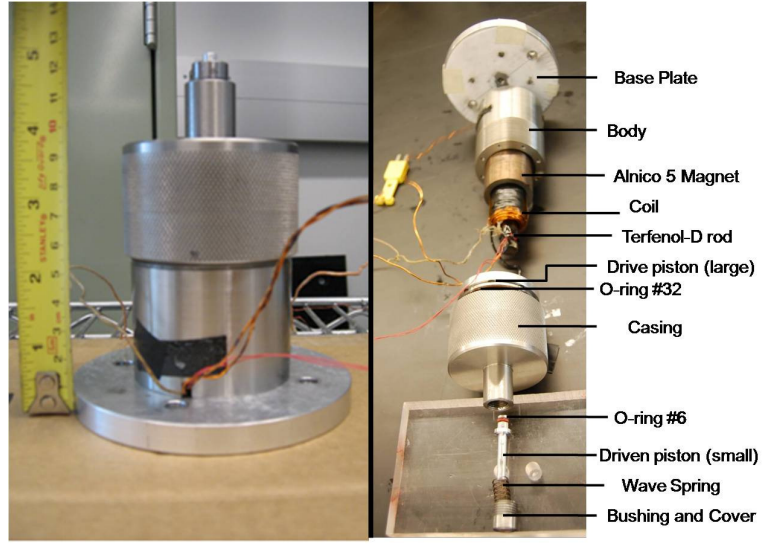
Assembled and exploded view of the magneto-hydraulic actuator.
